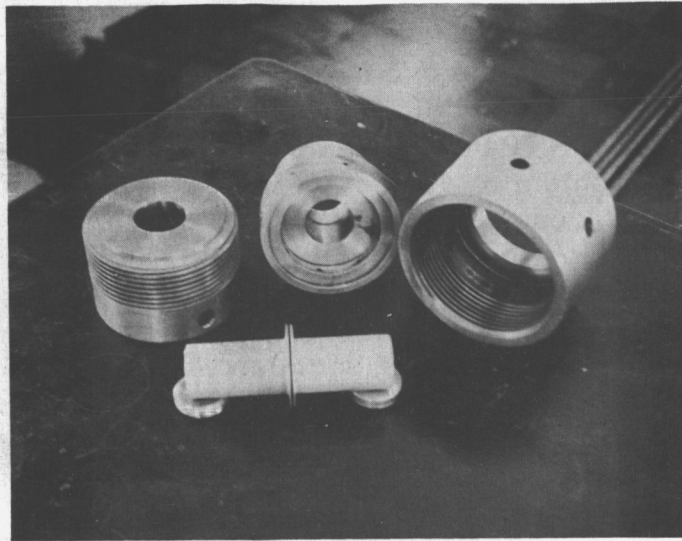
Flange-type Connection Before Forming Together with Disassembled Cover.
